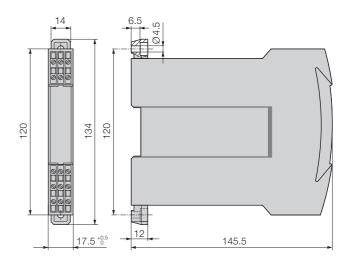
SINEAX TV 808 in housing S17, screw hole mounting brackets pulled out.
